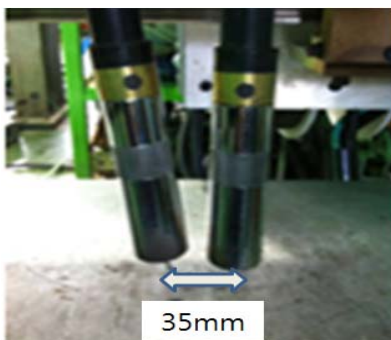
Tandem torch layout by 35mm nozzle outlet distance
